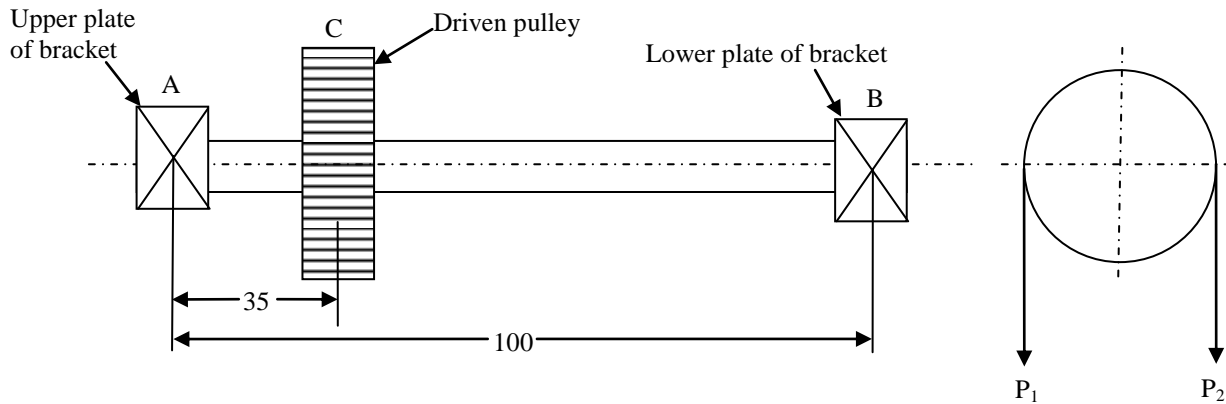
Space diagram of the rotating shaft of the magnetorheological honing tool.
